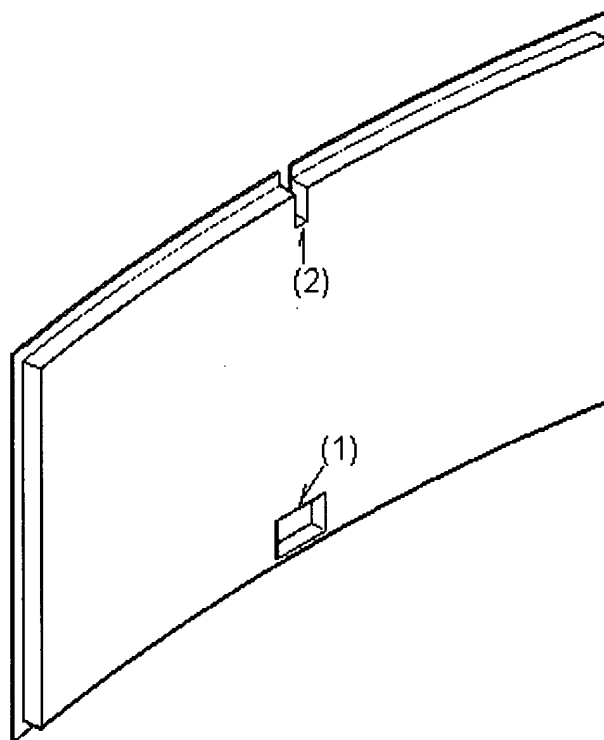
A passenger side isometric view of the windshield heating air appliance.
